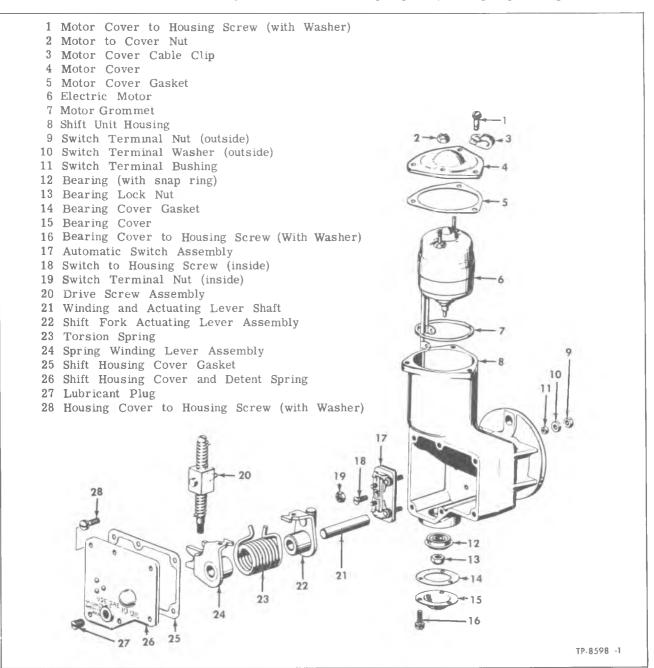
Electric Shift Motor Unit Components (Eaton and Corporation)
